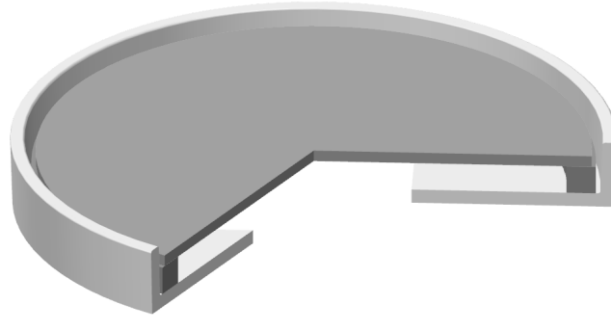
Illustration of the *Wall & Gasket* concept, where a section has been cut out to further illustrate the assembly.
